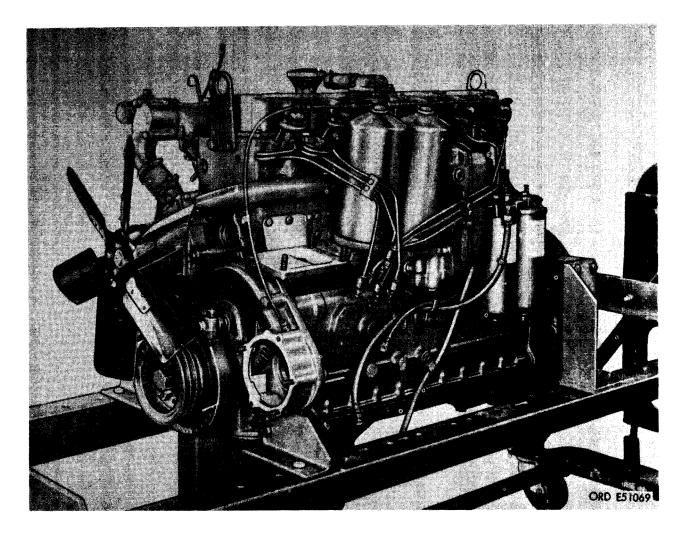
ENGINE ASSEMBLY MOUNTED ON OVERHAUL STAND - 3/4 LEFT FRONT VIEW. <u>b.</u> <u>Generator Assembly.</u> Remove generator ass-embly and drive belts following instructions for figure 41. Remove generator pulley following instructions for figure 42.
